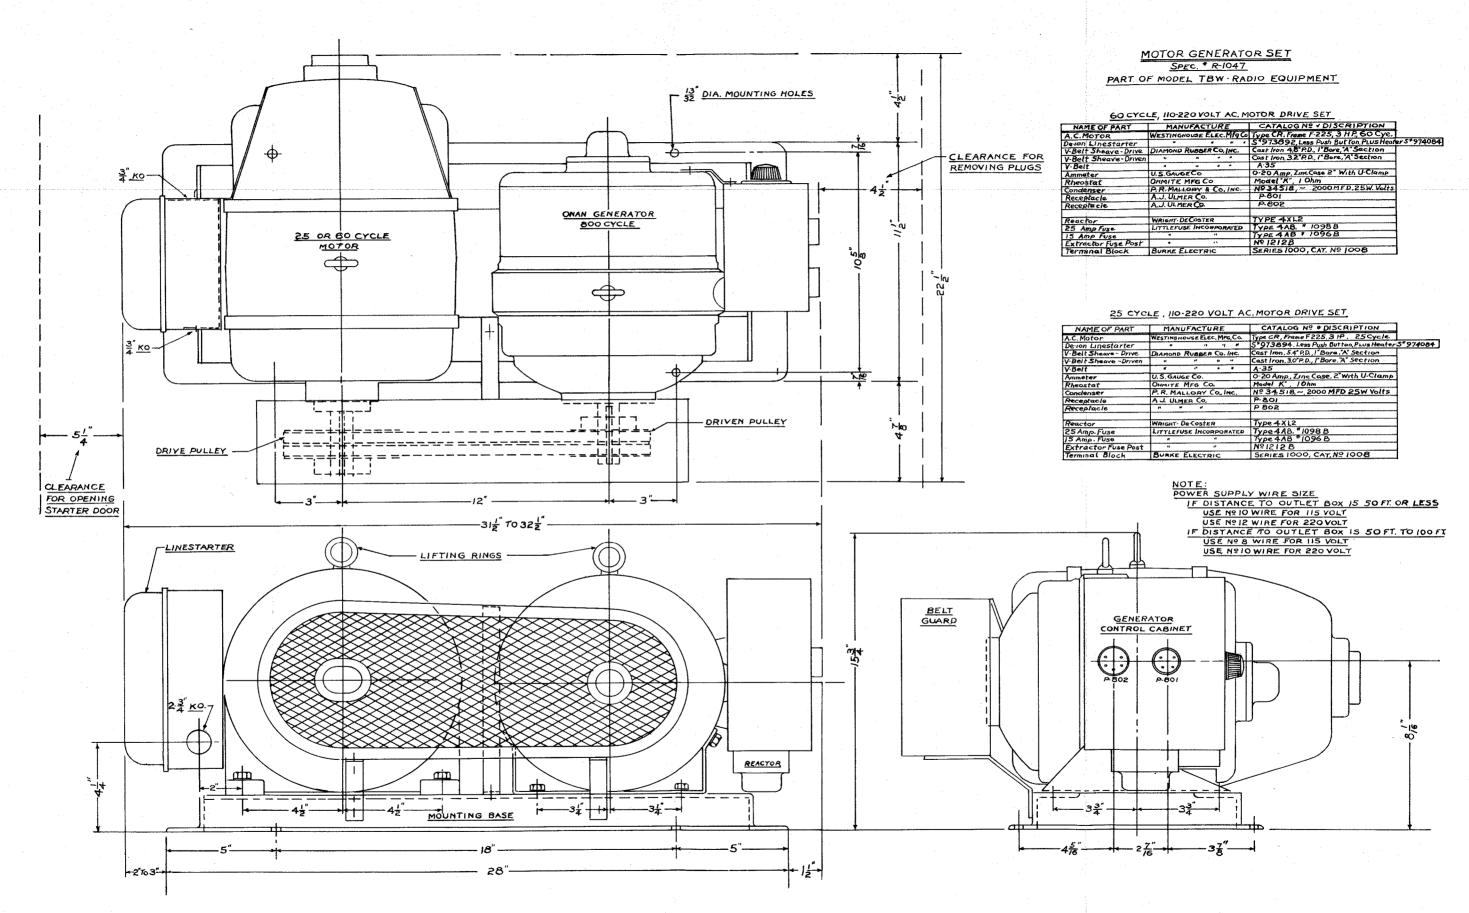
Outline and Mounting Dimensions, Motor Generator Set Type CDO-21648 and Type CDO-21652 (Drawing W-7300489)
